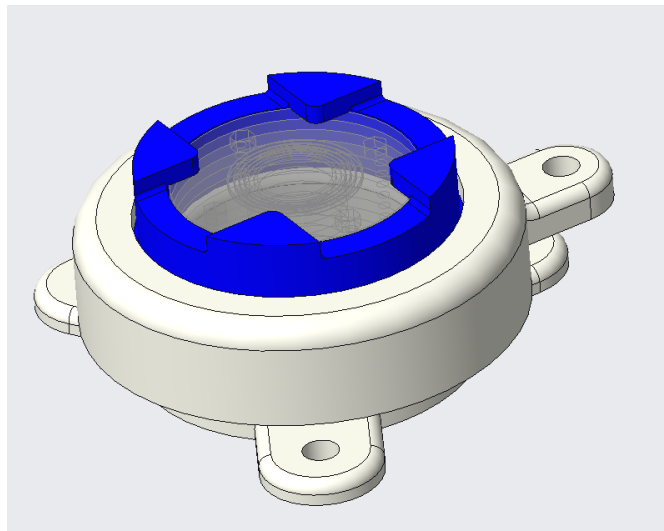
Assembled top loaded clamp frame to view sample from two orthogonal views.
